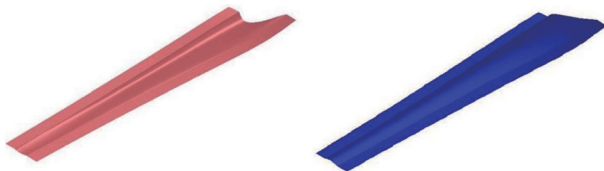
Mold surfaces for upper (left) and lower (right) parts.
